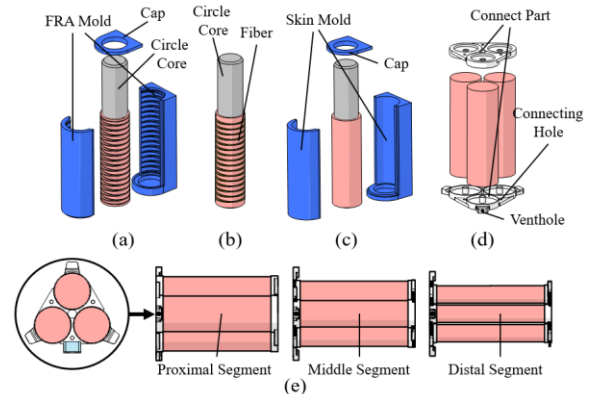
Fabrication processing of the SRL. (a) The fabrication of FRA's core; (b) Kevlar fibers are wrapped around the core surface; (c) The fabrication of FRA's skin; (d) FRA's ends are bonded with connecting parts; (e) Connecting three segments to complete the assembly of the SRL.
